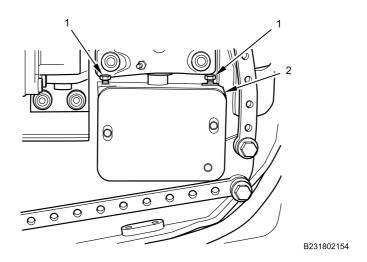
Upper Hex Bolt Removal from Inner Shaft Lock Plate Bracket.
